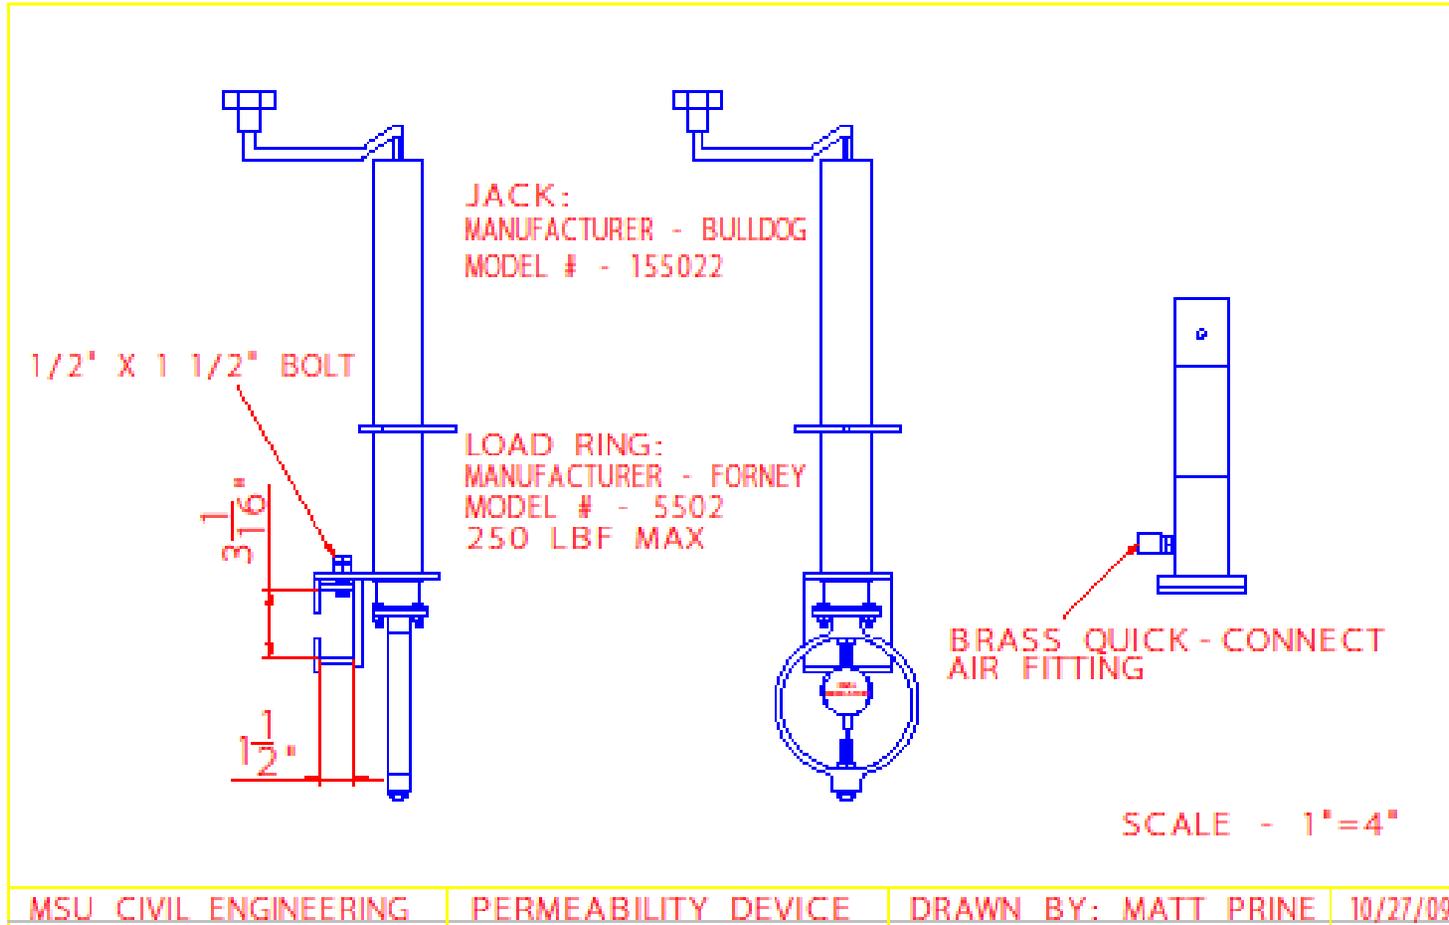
Integral Jack and Bracket and Standpipe Fitting
